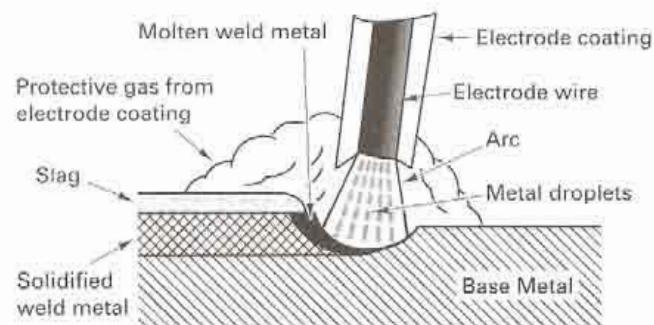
Schematic diagram of shielded metal arc welding (SMAW). (Courtesy of American Iron and Steel Institute, Washington, DC.)
